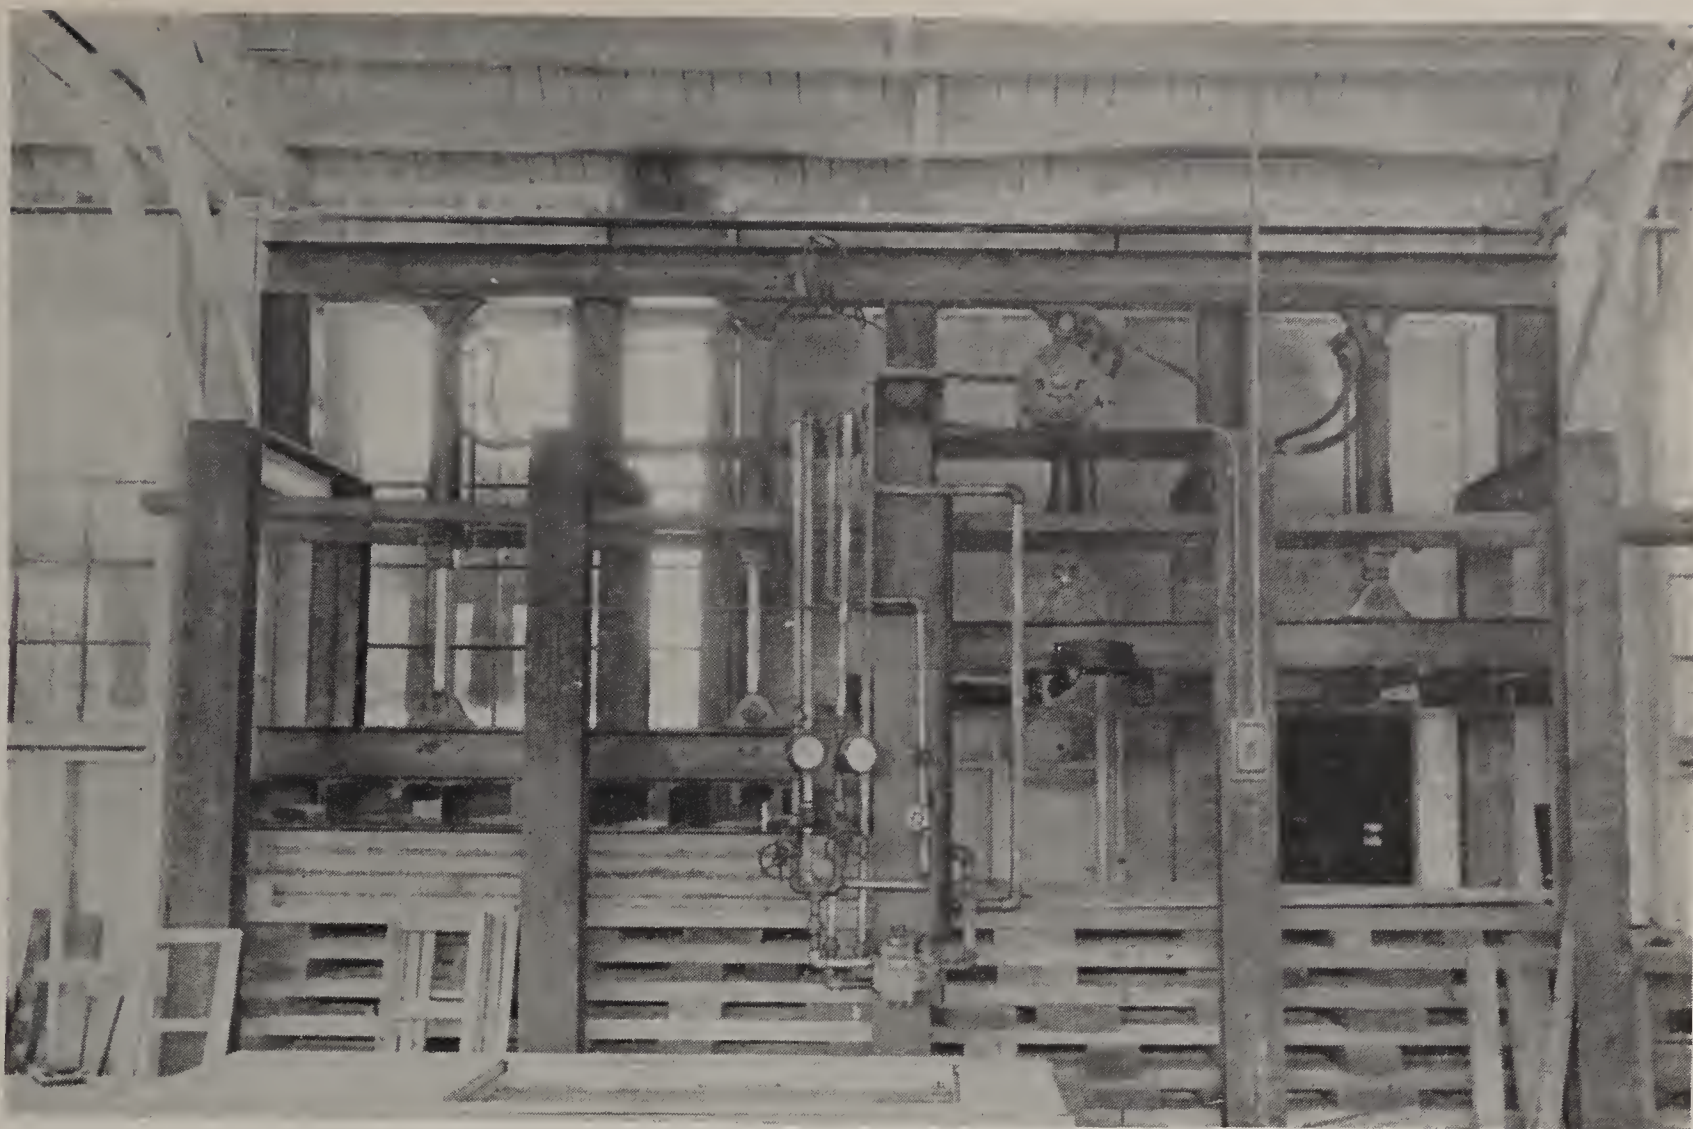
Double hydraulic cold press capable of pressing two stacks of 8-foot panels simultaneously.
